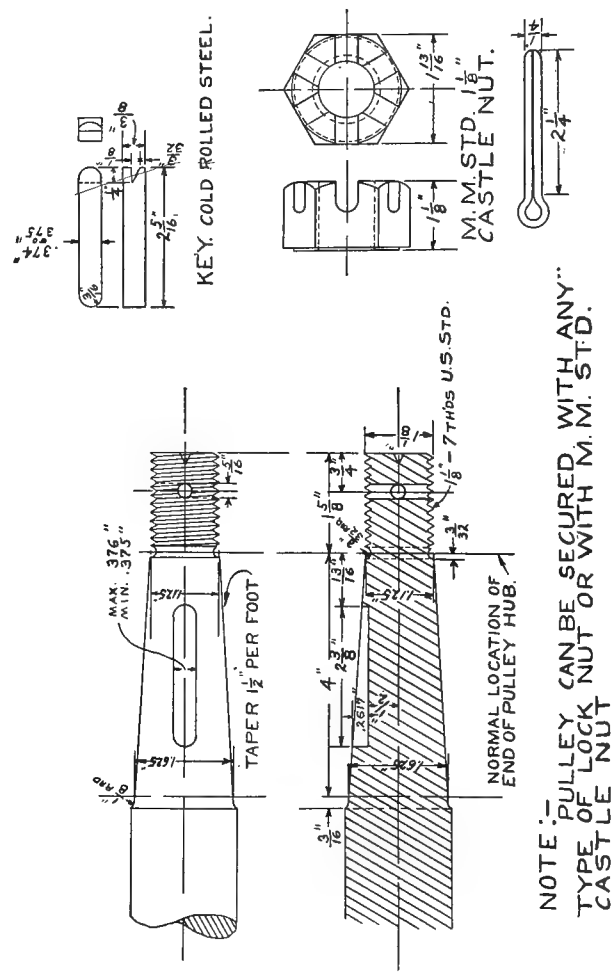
Recommended Practice for Pulley End of Armature Shaft. (M. C. B. Sheet U-11.)
